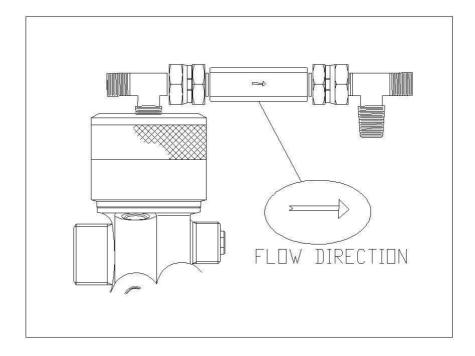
Non-return valve assembly in a multi-cylinder system with directional valves
